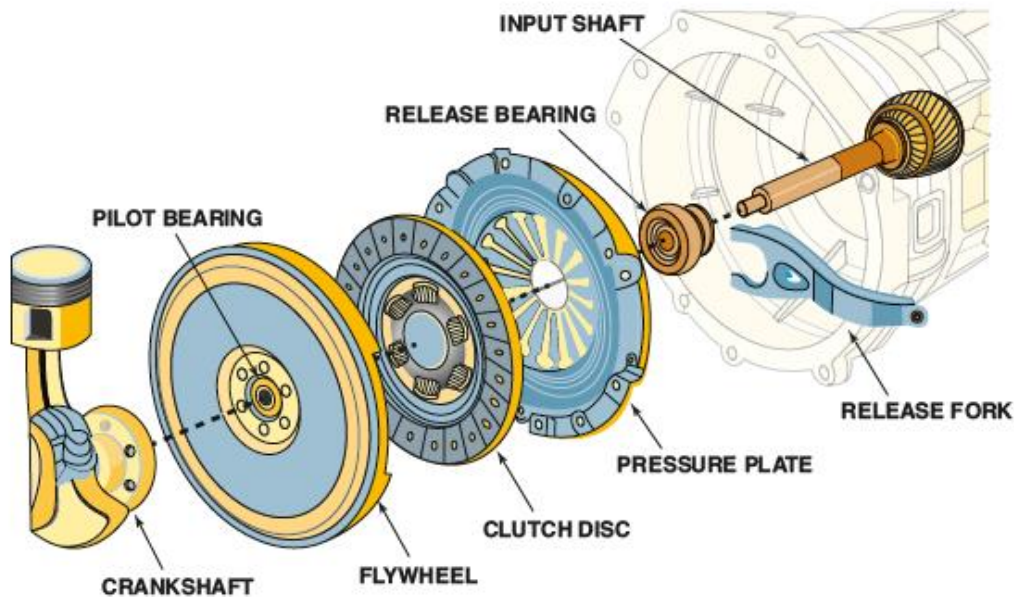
The clutch disconnects or connects the engine flywheel to the transmission input shaft.
